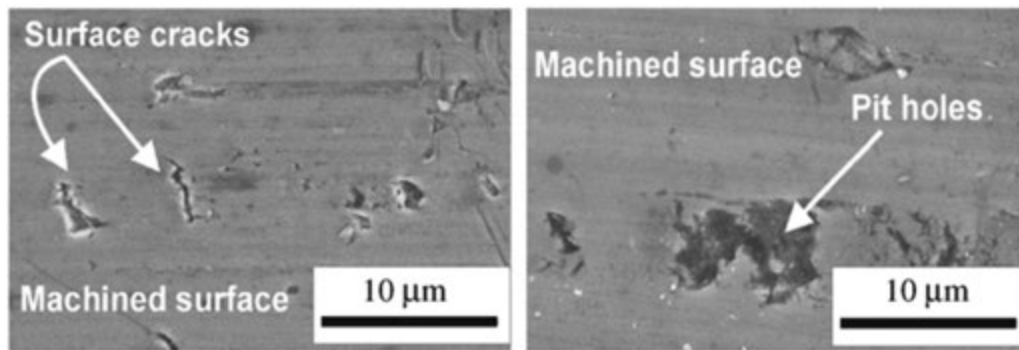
Common surface defects including cracks and pit holes on machined surface. Reproduced from Kannan, S., Kishawy, H.A., 2006. Surface characteristics of machined aluminium metal matrix composites. *International Journal of Machine Tools & Manufacture* 46, 2017–2025.
